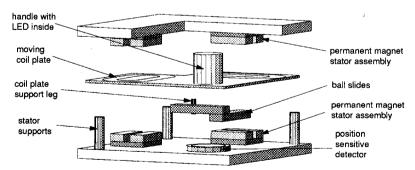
MAGICMOUSE PROTOTYPE ASSEMBLY - EXPLODED SCHEMATIC
